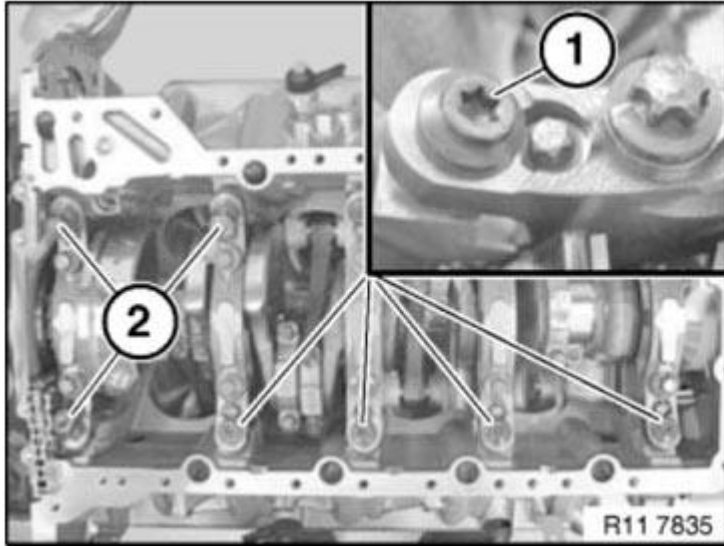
Identifying Main Bearing Taper Screw Connection And Oil Pump Spacer Pins
